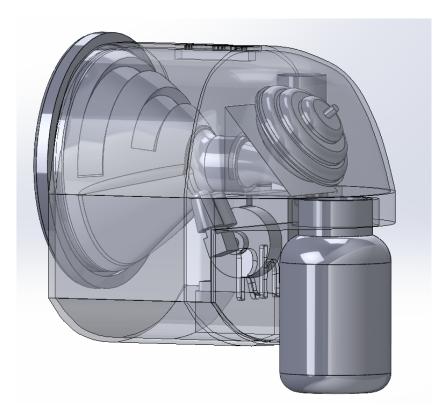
SolidWorks model of physical assembly with a view of inner component placement.
